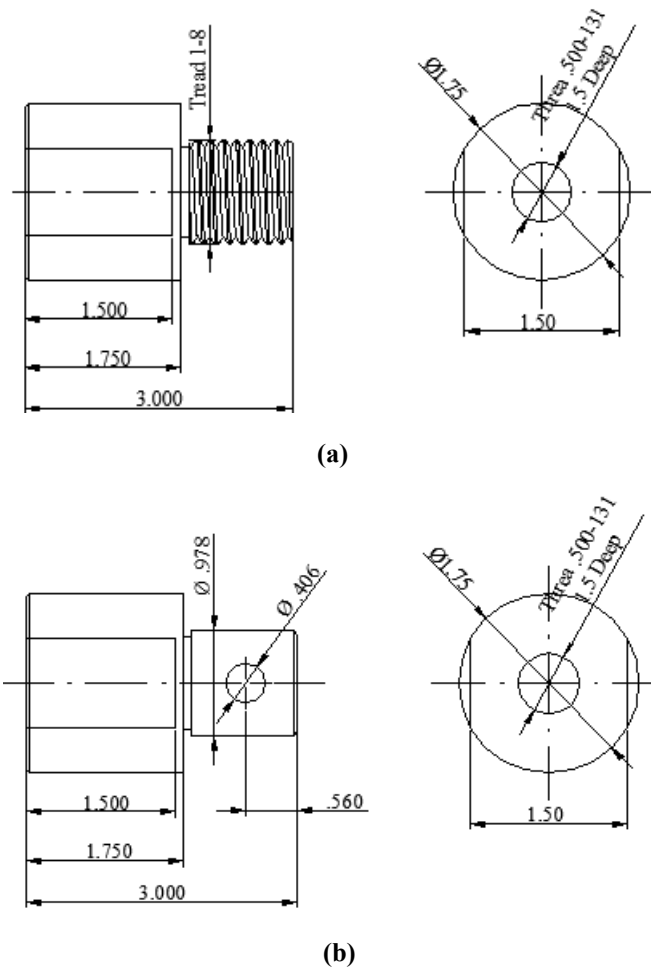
(a) Dimensions of the upper grip; (b) Dimensions of the bottom grip.
